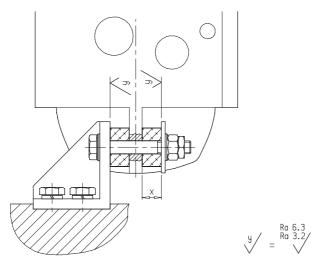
Torque arm on parallel shaft helical gear unit
